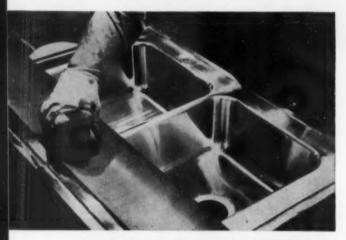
Traveling abrasive belt is used to finish weld areas on Type 302 stainless-steel sink top. Finish produced with a 120 grit approximates a No. 4 standard mill finish.
